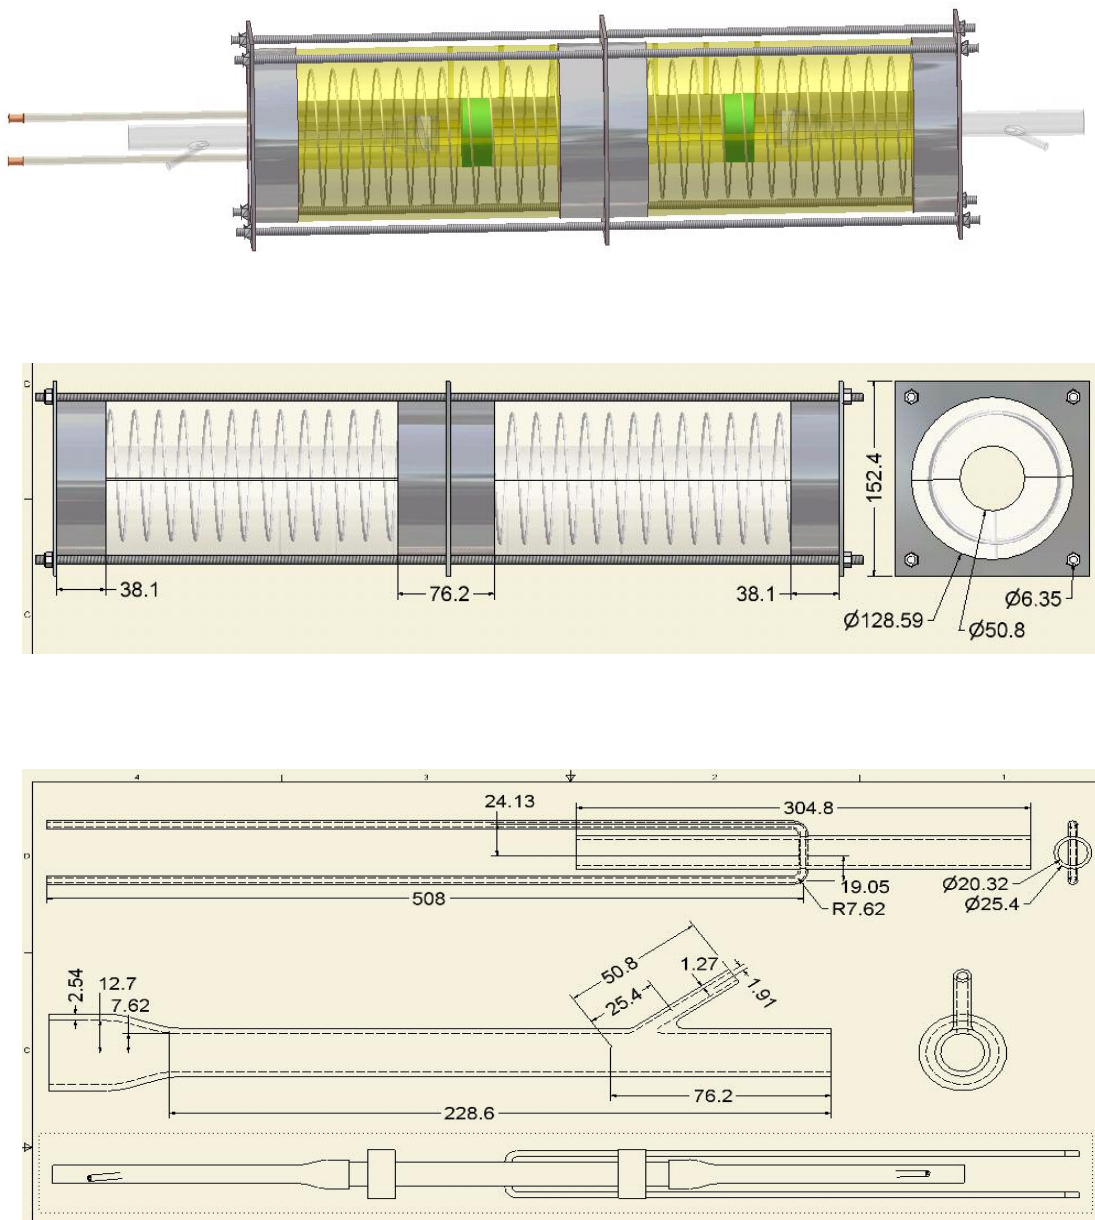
From top to bottom: Glass Cell and heater assembly, heater dimensions, and Glass Cell and its accessories dimensions
